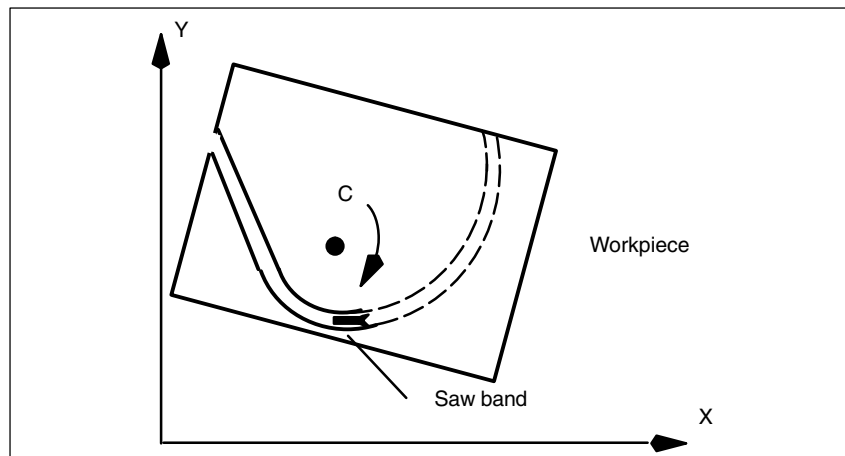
Tangential positioning of a workpiece on a bandsaw
